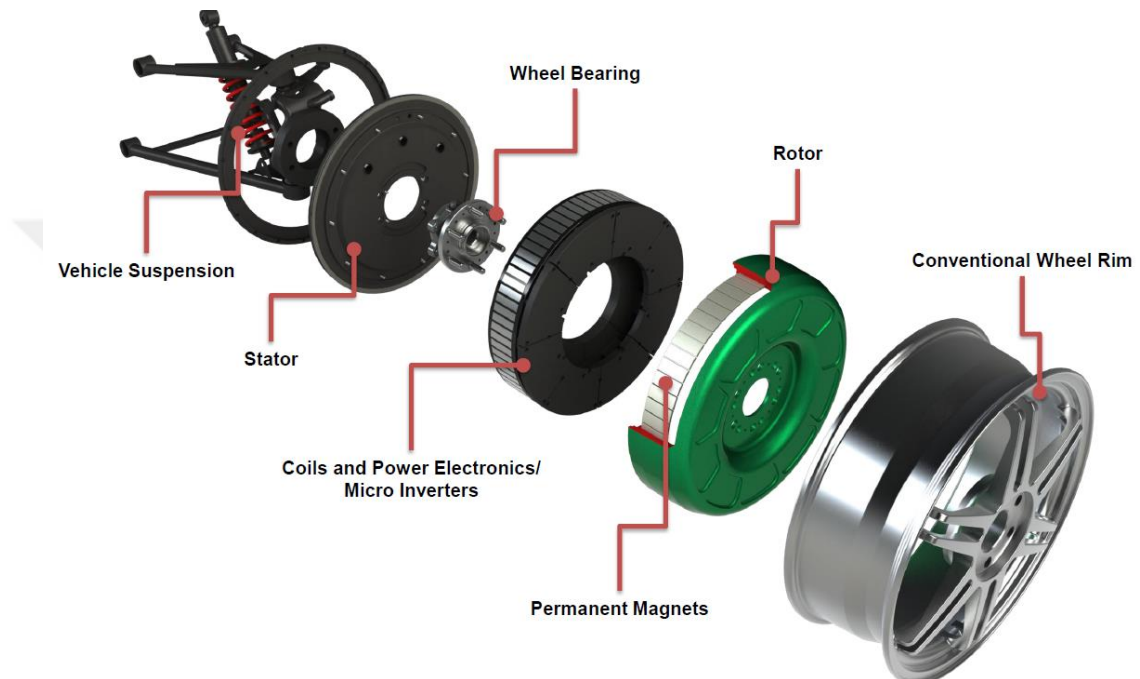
Protean Electric HUB Motor Exploded View (Protean, 2013)
